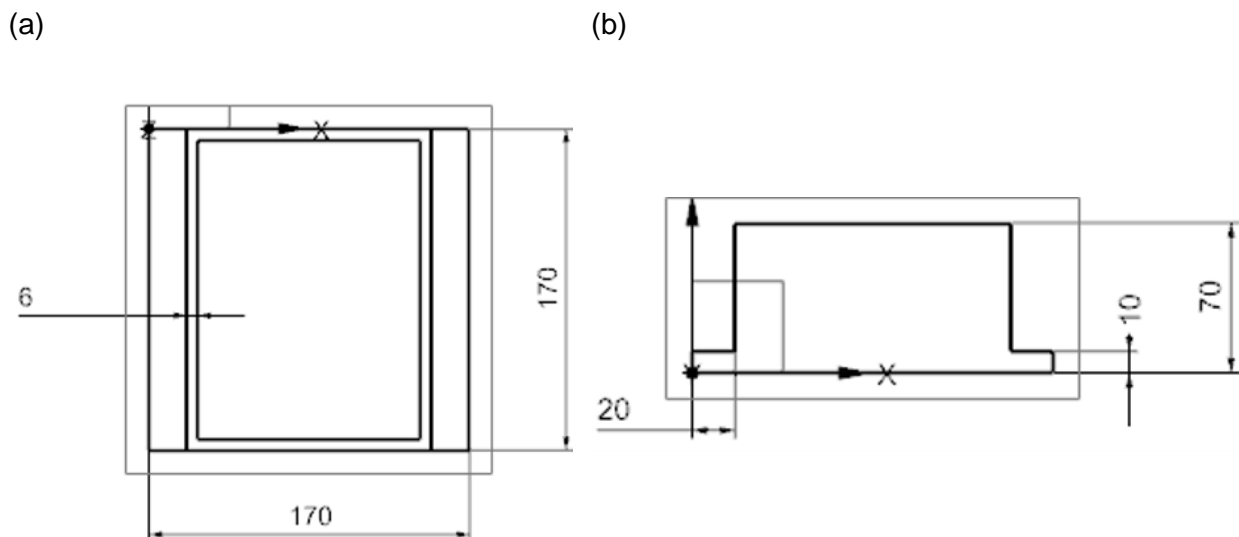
(a) Rectangular pocket geometry dimensions top view, (b) Rectangular pocket geometry dimensions top view.
